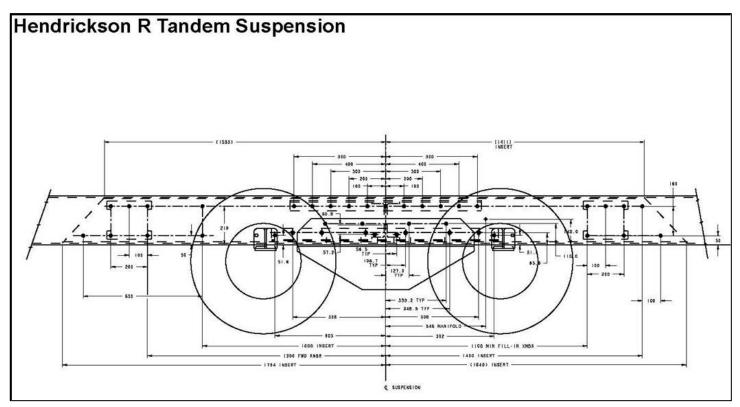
Hendrickson R Tandem Frame Drilling (Dimensions In Millimeters)
